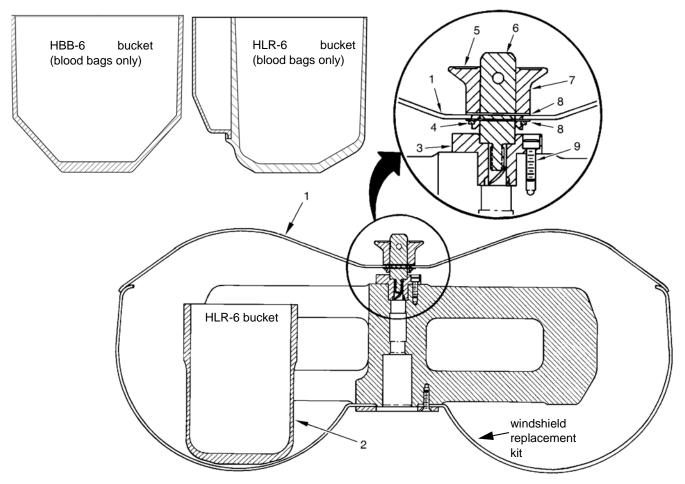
Parts of the H-6000A, HBB-6, and HLR-6 Rotors
